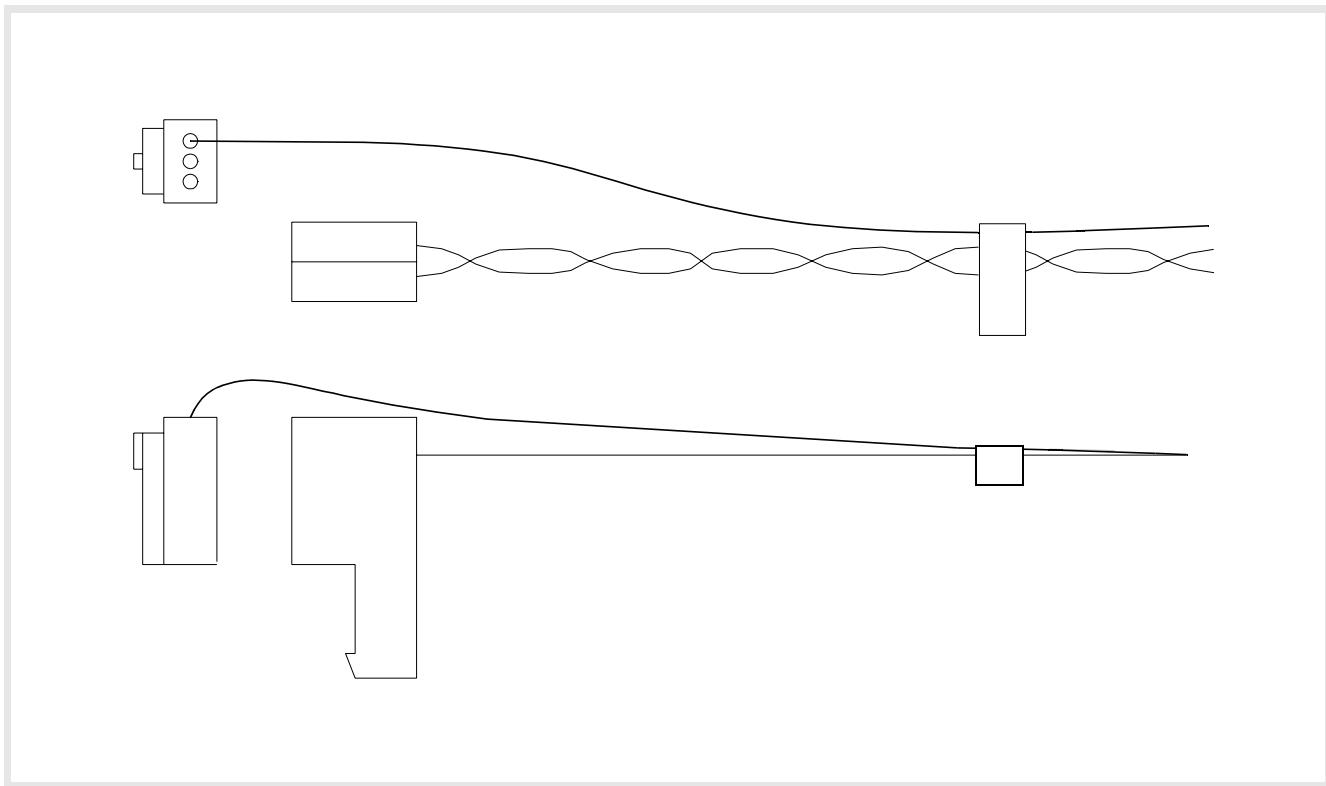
DVS EIDE Drive Cable Assembly (P/N 3500-2920-XX)
